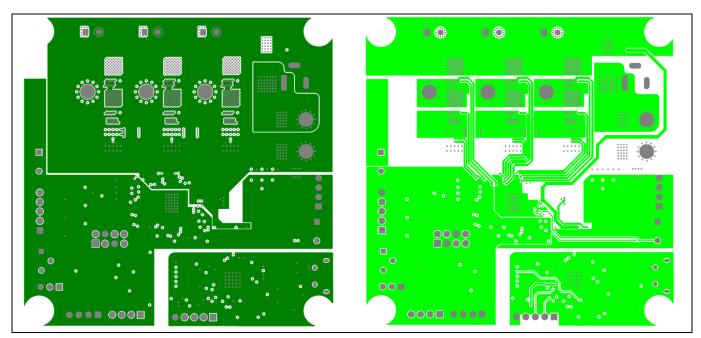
REF_IMD701A_720W_DC24 PCB internal layers 3 (left) and 4 (right)
